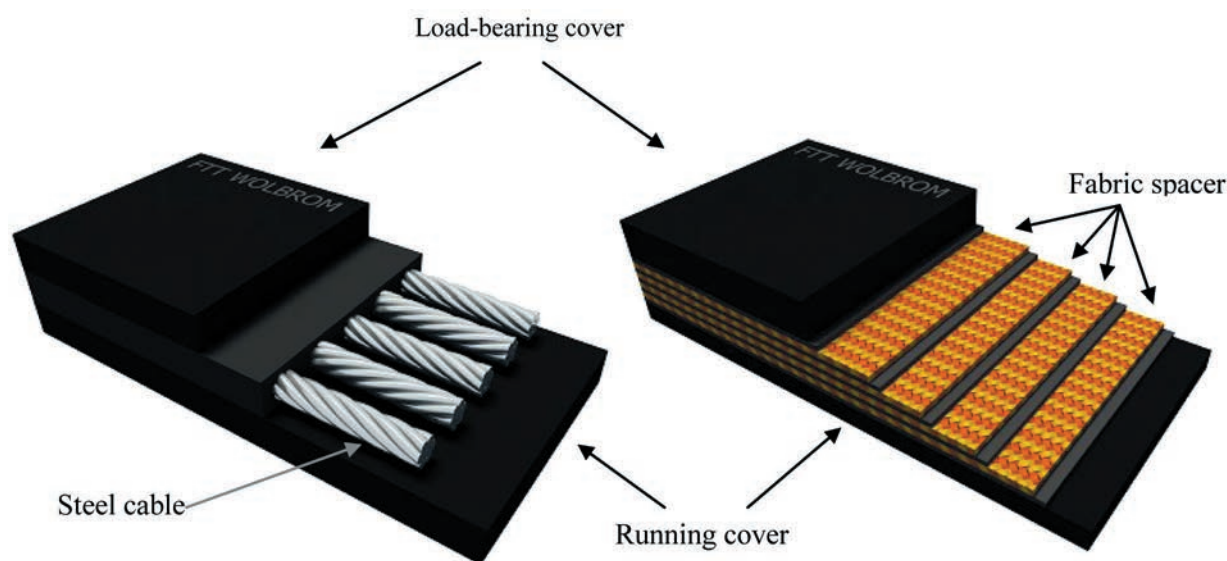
Conveyor belt with steel cords and fabric-rubber conveyor belt
